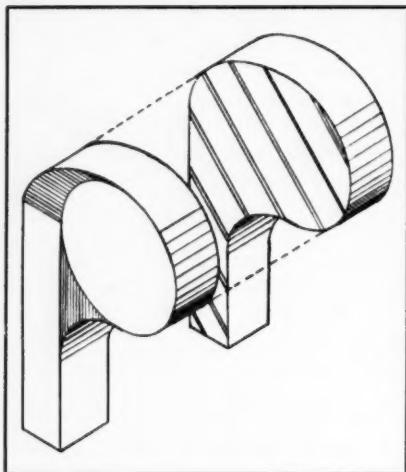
The sheet is placed tangent to the solid rod and welded solidly top and bottom. After dressing off the weld, an oval-shaped beading results, as shown in the sectioned view at the rear.
